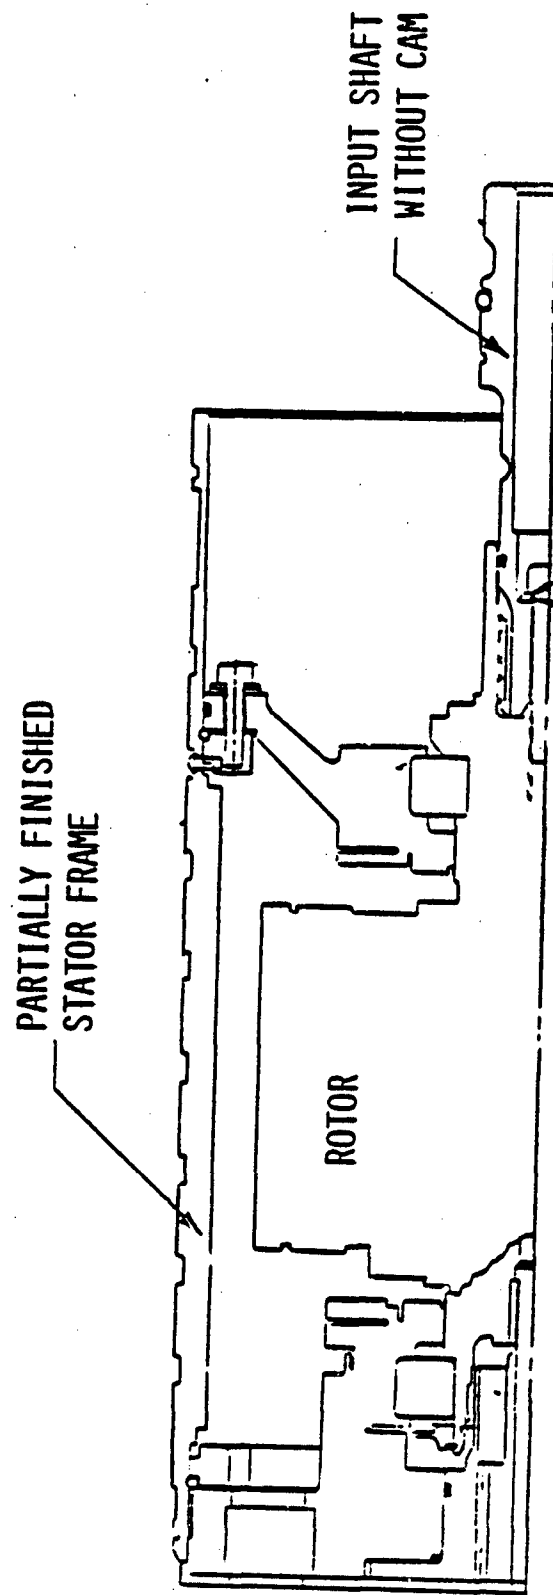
Spin test assembly. Rotor is housed in a partially machine stator frame.
